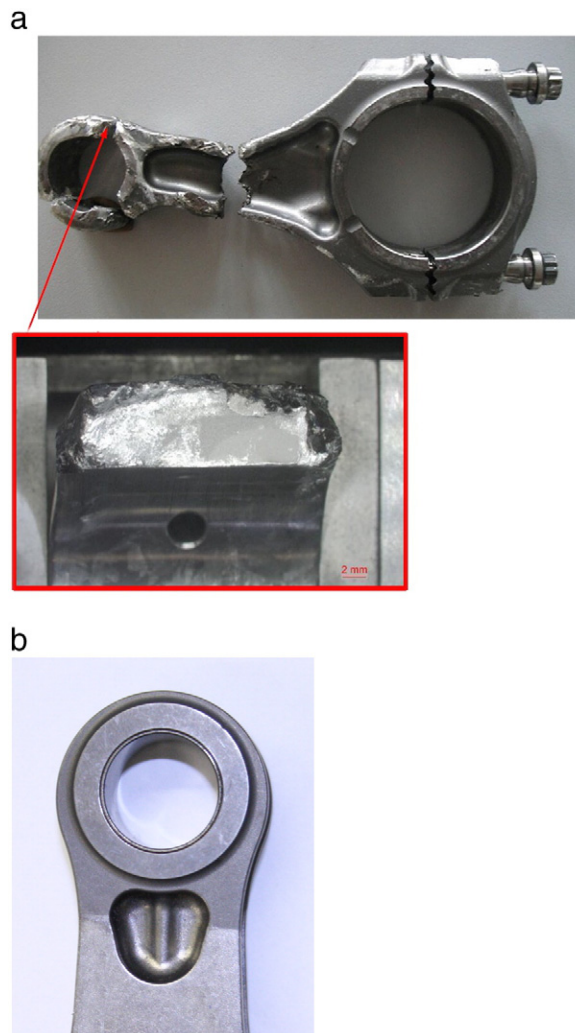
Fretting in con-rod small end: (a) fatigue crack in con-rod small end; (b) titanium con-rod small end with DLC anti-fretting coating.
